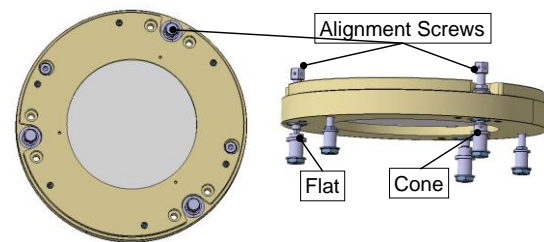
Top and side view of alignment screws on 'Floating Ring Assembly'.
